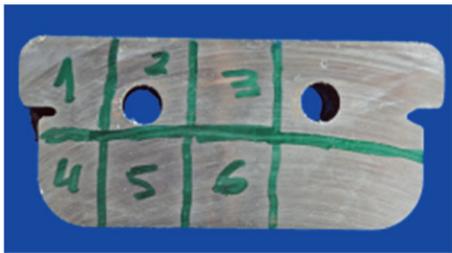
Heat cracks with the internal cooling circuit shape.
